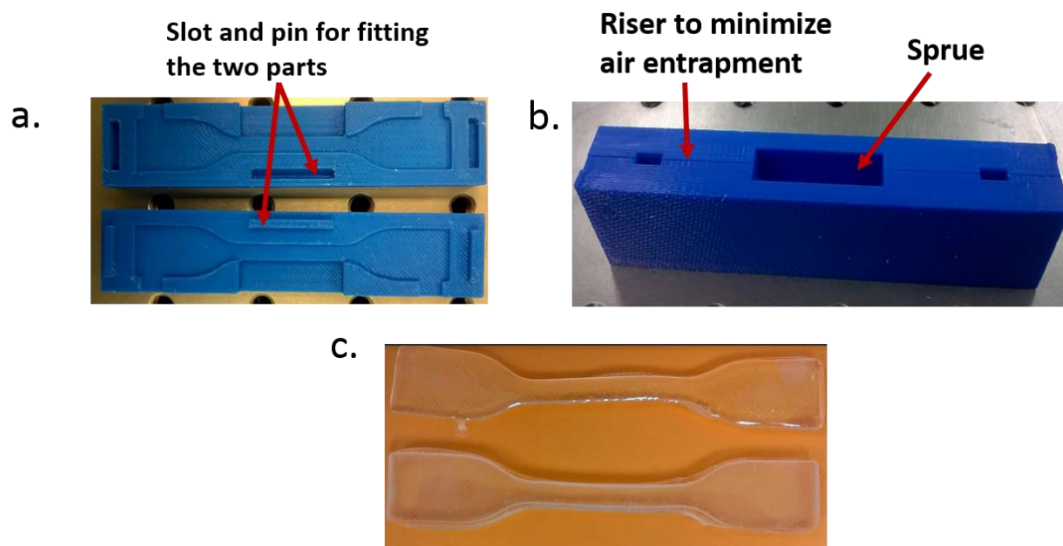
Process flow for molding dumb-bell test specimens. (a) A two- part mold; cope and drag format design to ensure uniform sample thickness, (b) Assembled mold, (c) Representative dumb-bell specimen of clear ballistic gel #20
